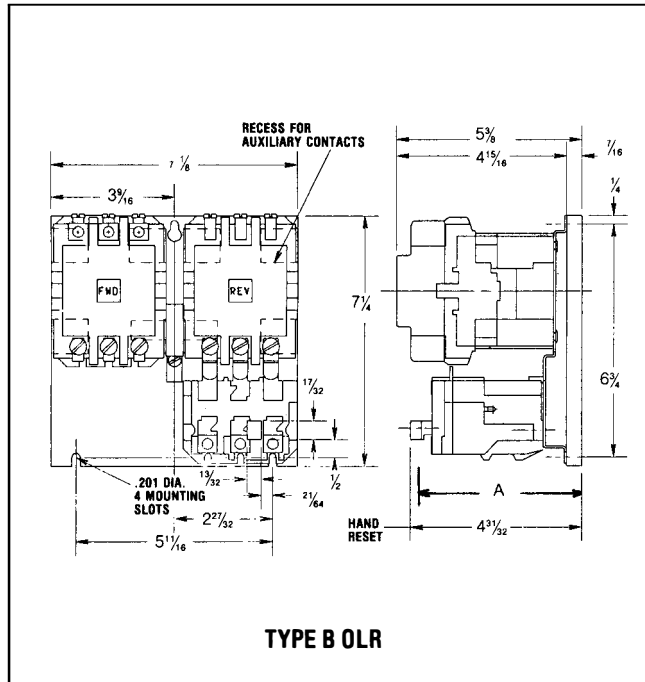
A210 Dimension Drawing (Dim. in inches)
